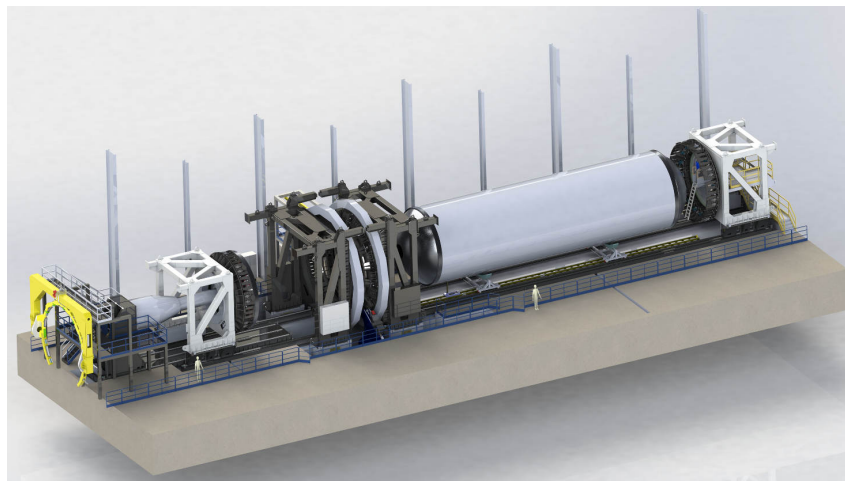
FSW machine used to manufacture Ariane 6 cryogenic fuel tanks [36].
